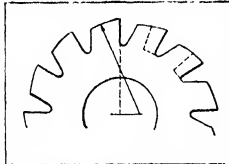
RELIEVED TEETH OF MILLING CUTTER
